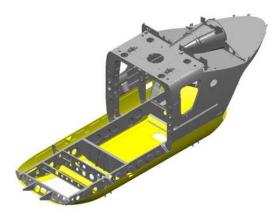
Sheet-Stringer Design (e.g. EC135 Center Fuselage)
